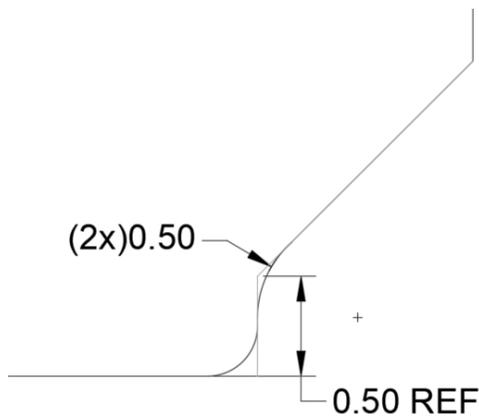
M.2-1A(A, B, C, D) Card Edge Outline Side Chamfer
